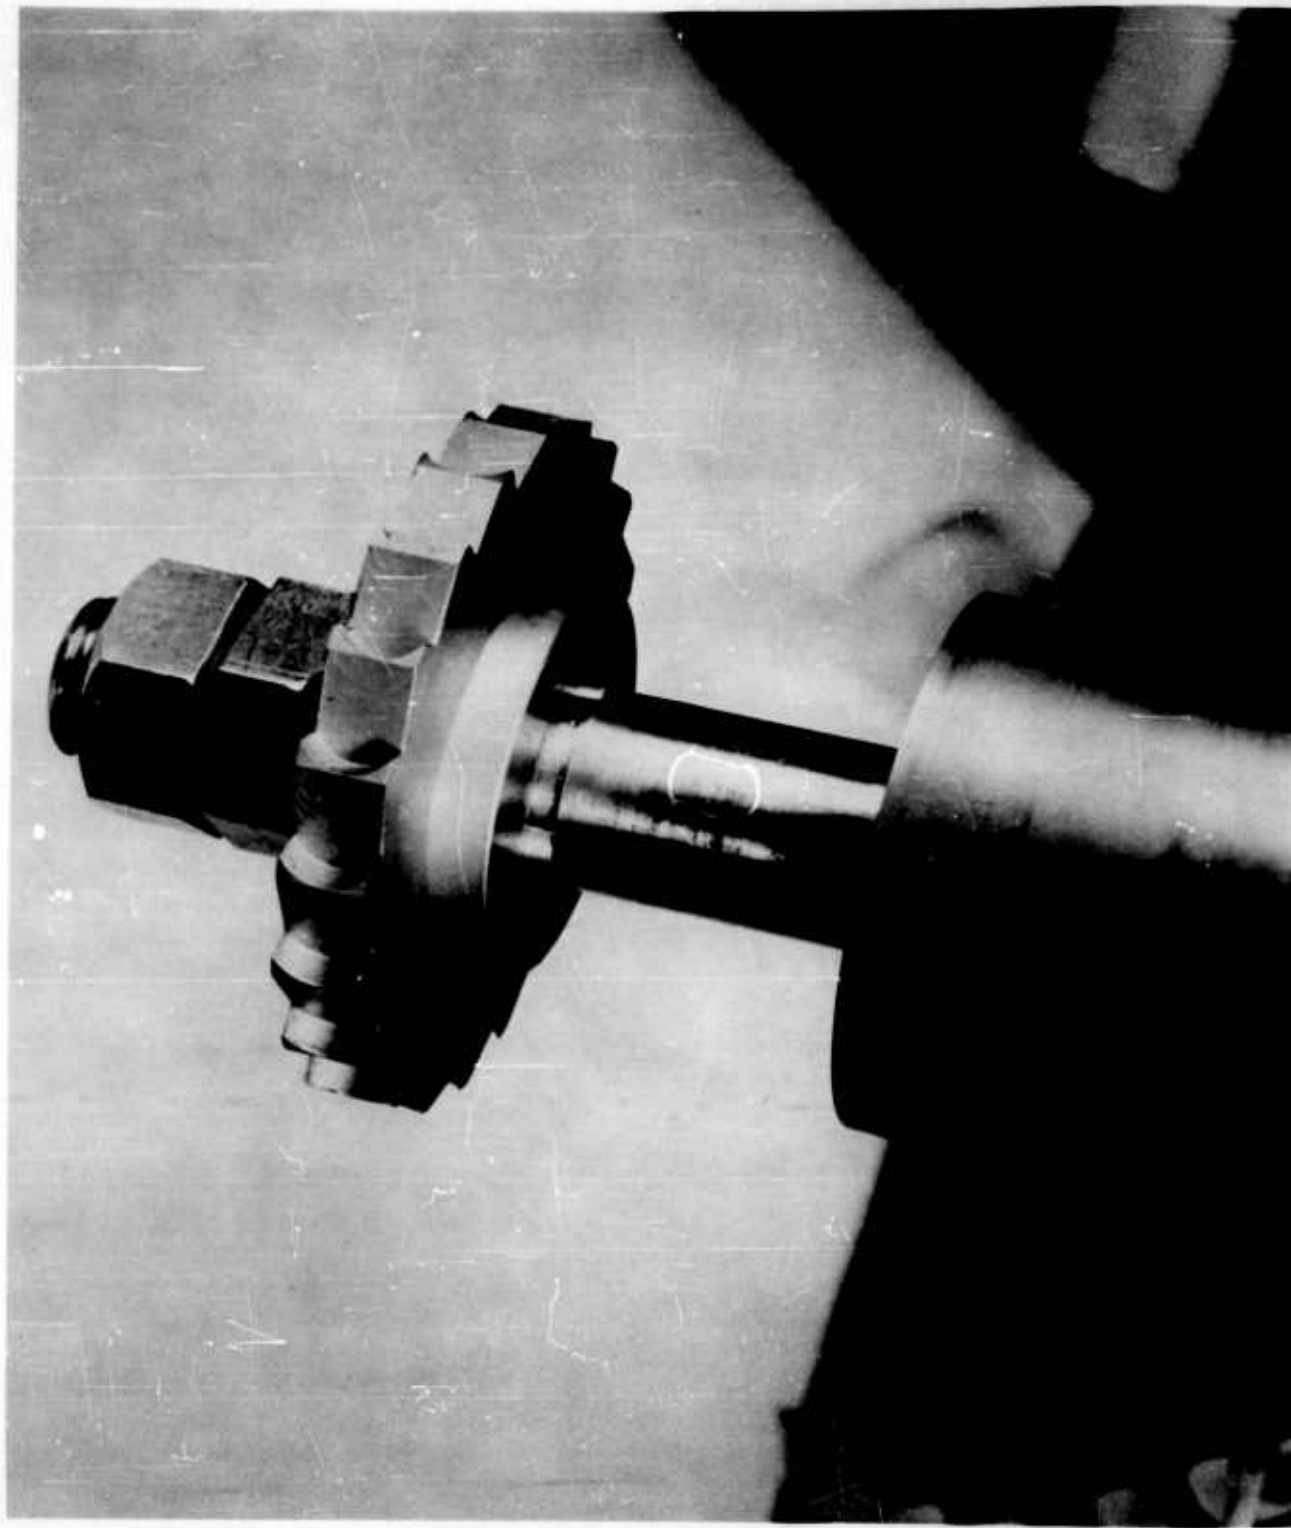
Turbine wheel locking arrangement showing woodroof keys and locknuts.
